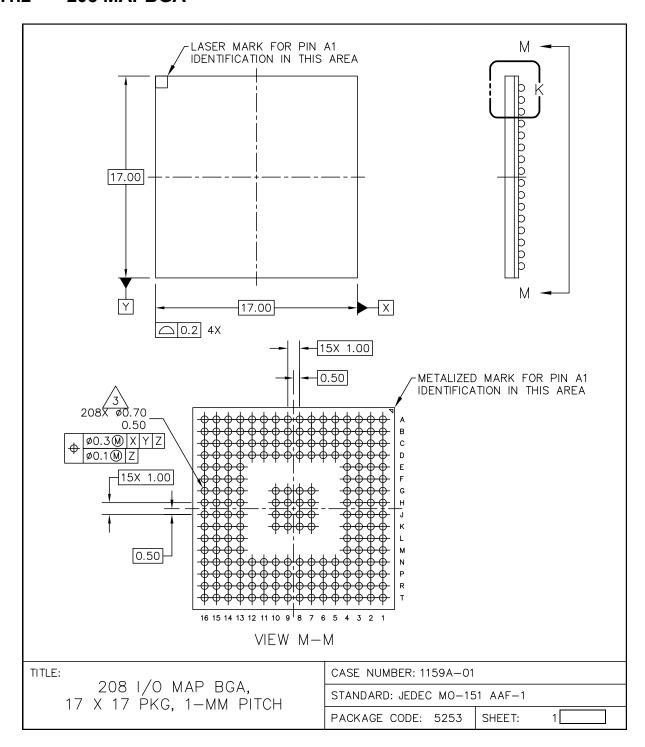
208 MAPBGA package mechanical drawing (part 1)
